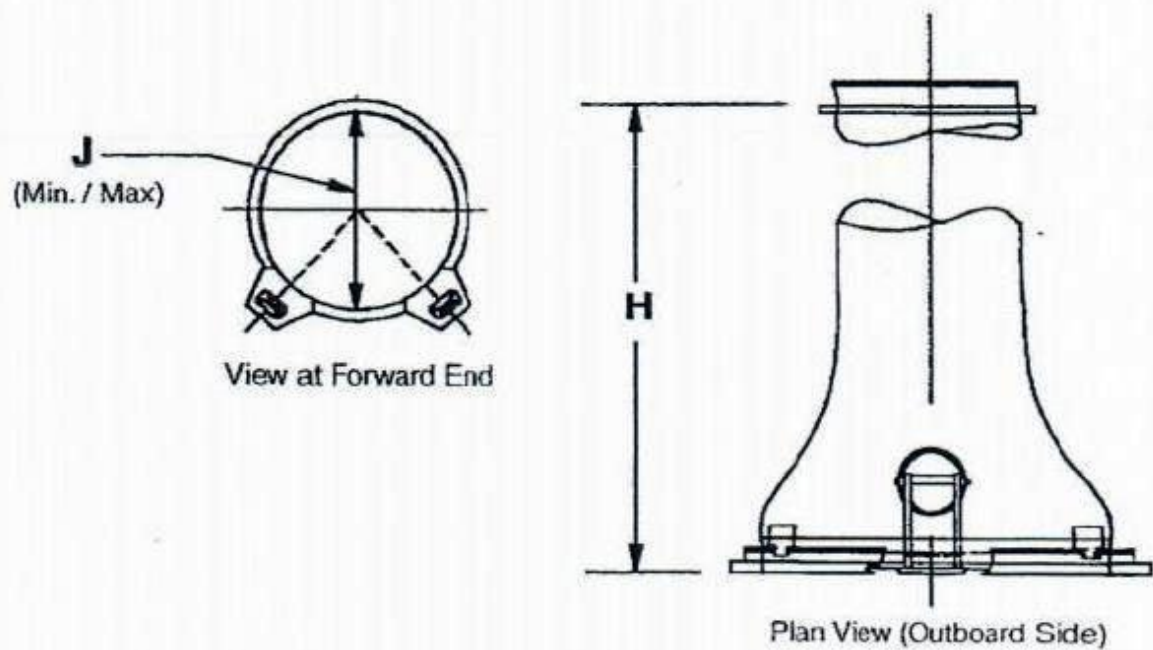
(Continued): DLN Version 1 Combustion (Overall Dimensions) - Notes
